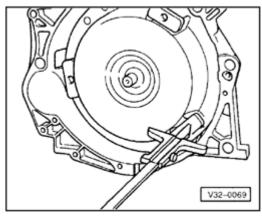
Checking Torque Converter Is Correctly Positioned Courtesy of VOLKSWAGEN UNITED STATES, INC.
